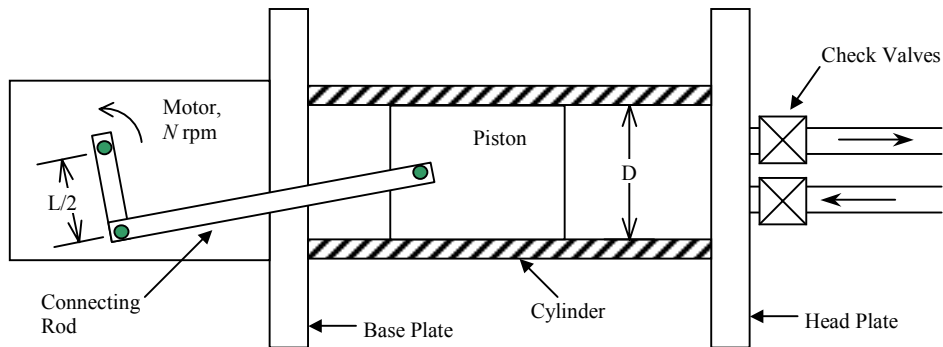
Horizontal single-acting piston pump (ref, Orlins & Constans, 2001)
